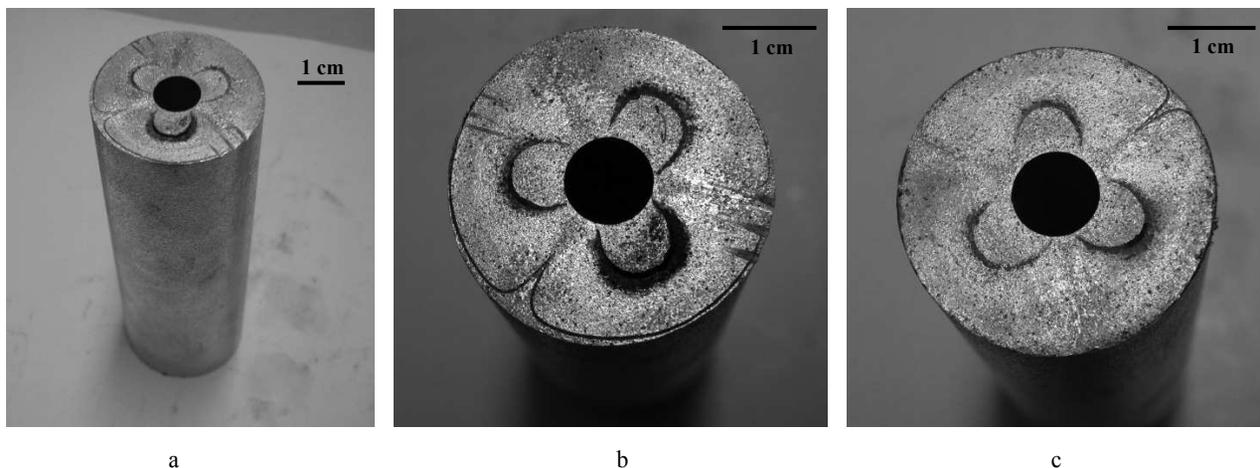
a) Extruded experimental profile, b-c) seam weld regions and partially-filled defective region in specimen section
